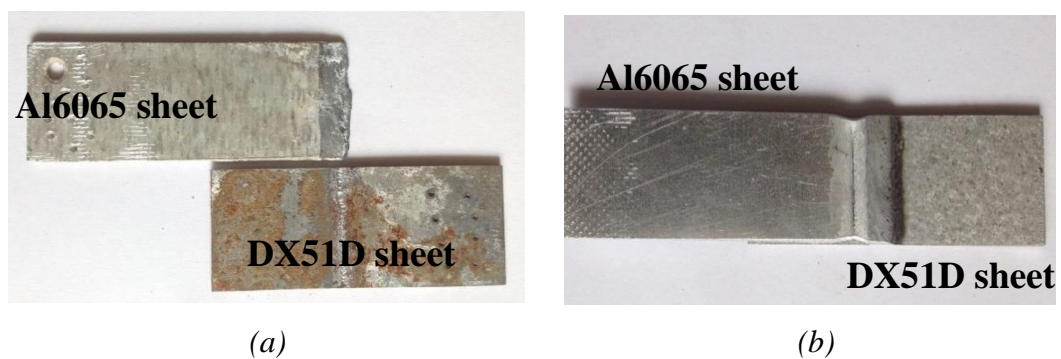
Rupturing appearances of (a) corrosive specimen and (b) non-corrosive, specimen after being tested.
